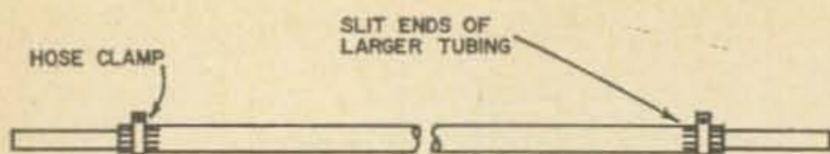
Construction of a typical element, showing the adjustable end sections.
